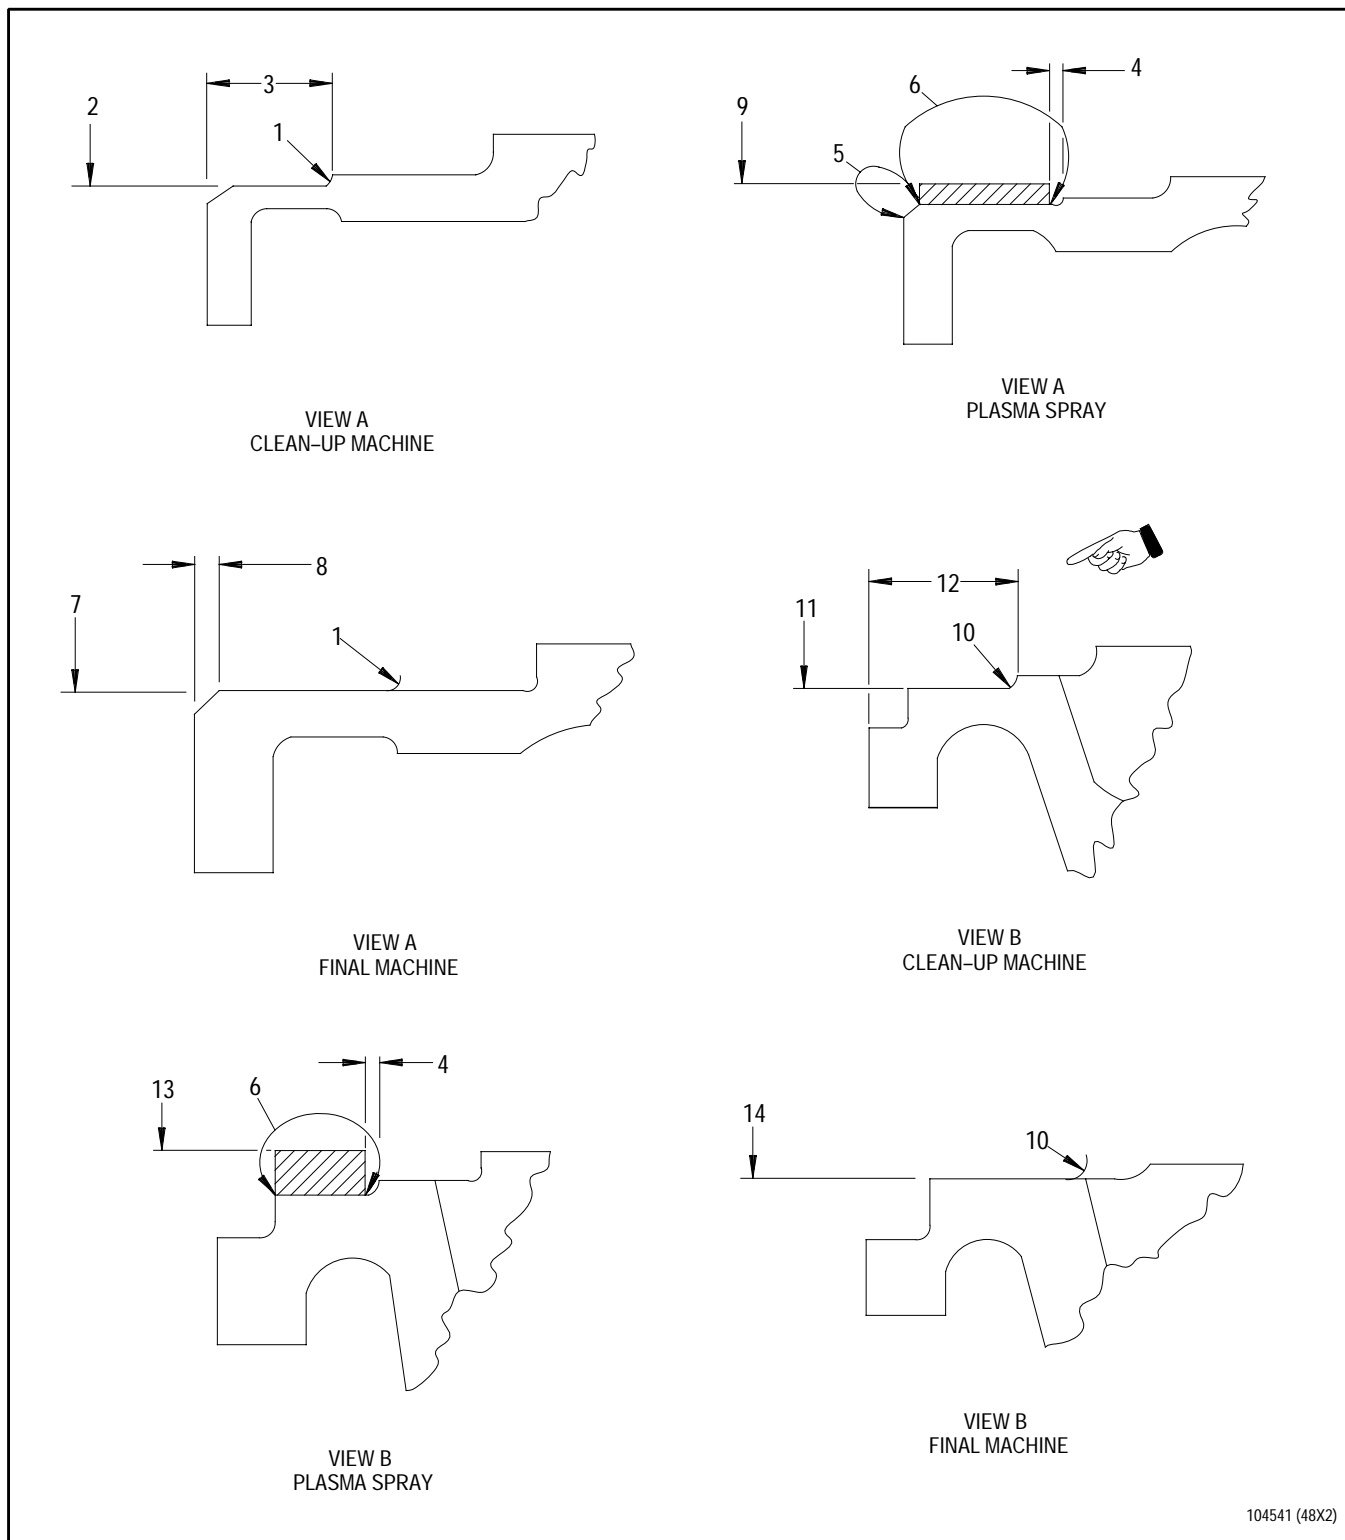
Compressor Intermediate Case Assembly - Plasma Spray Repair (Sheet 3 of 5)
